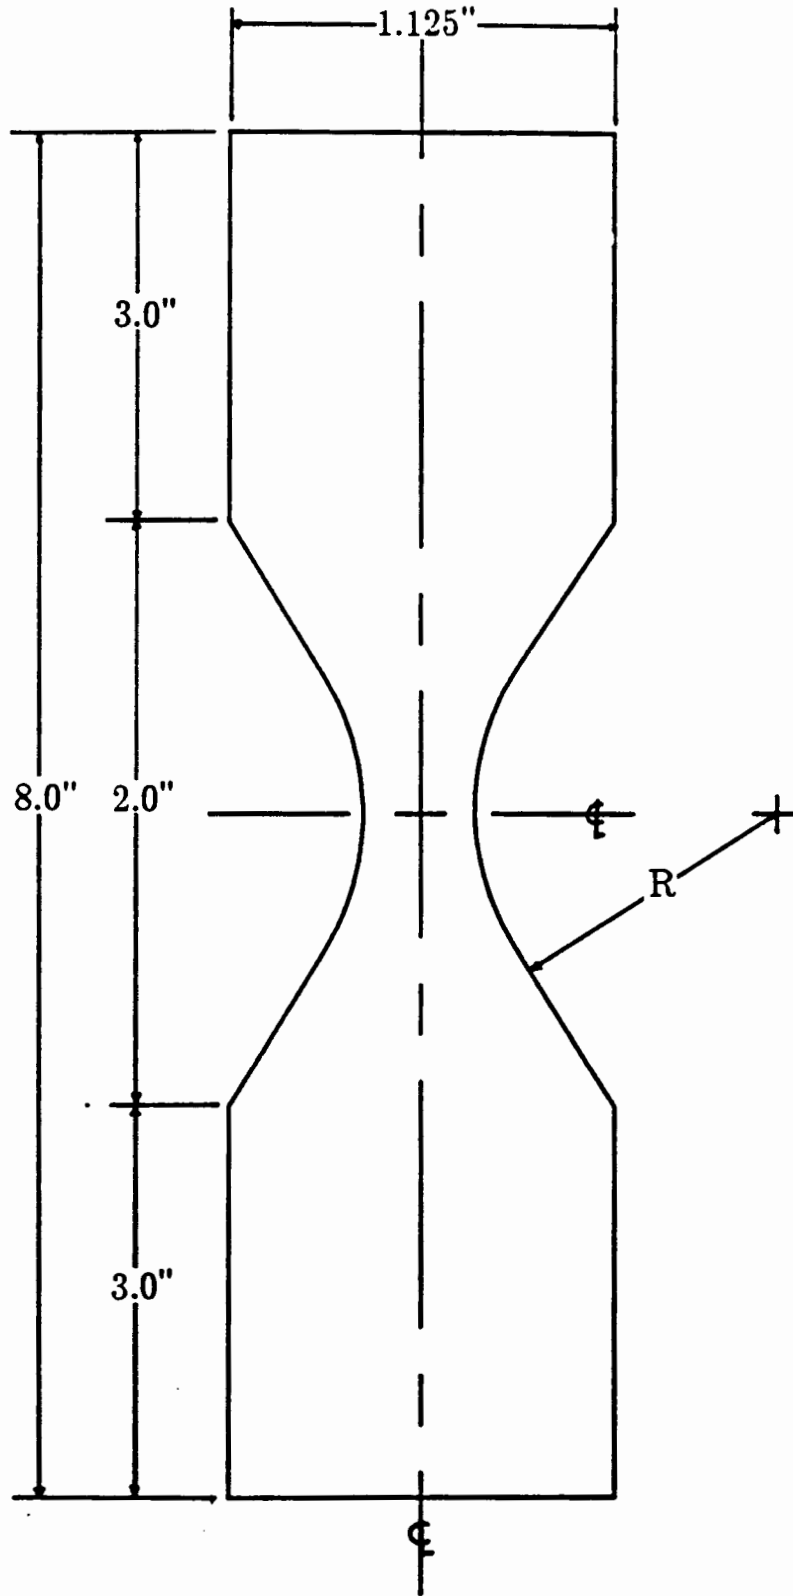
X - SHAPED TEST SPECIMEN
